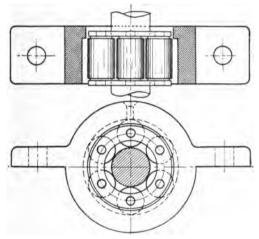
Details of Roller Bearings for Elevator Drum and Gears
